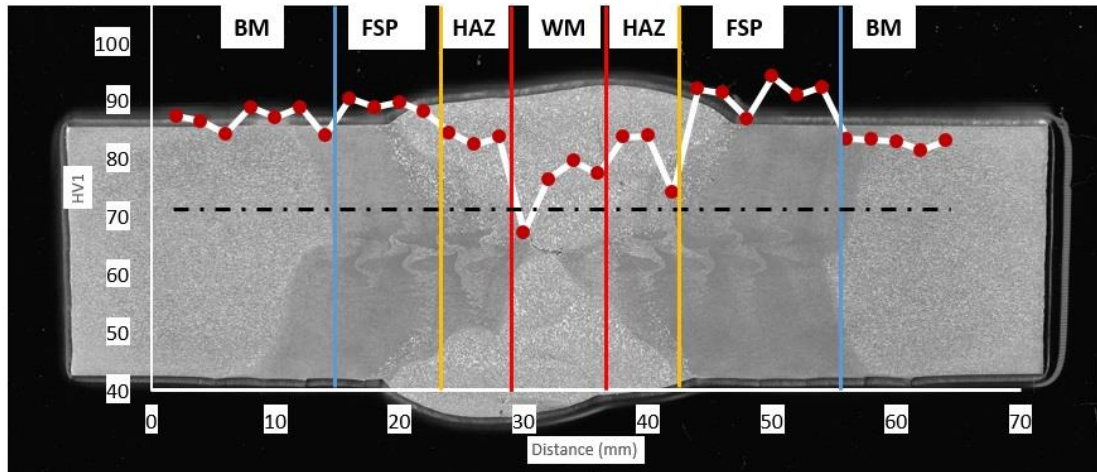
Hardness profile of the FSPed and welded plate (7 mm below the surface)
